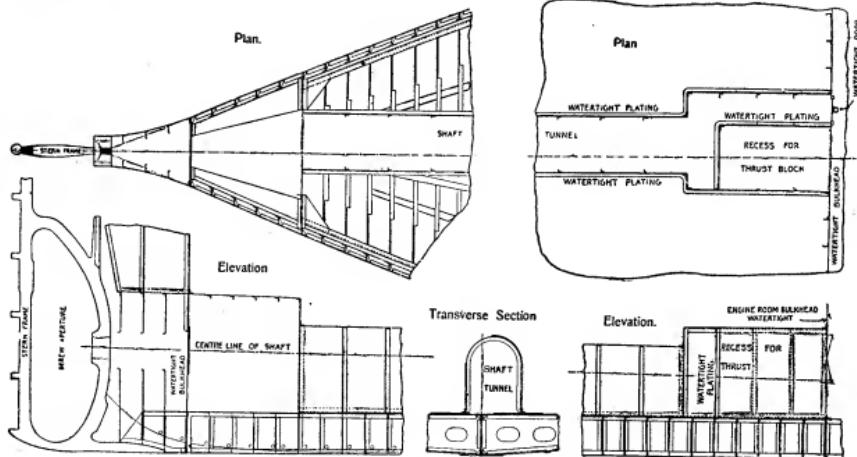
Stern Framing, Shaft Tunnel, &amp;c., of Single-Screw Ship.
